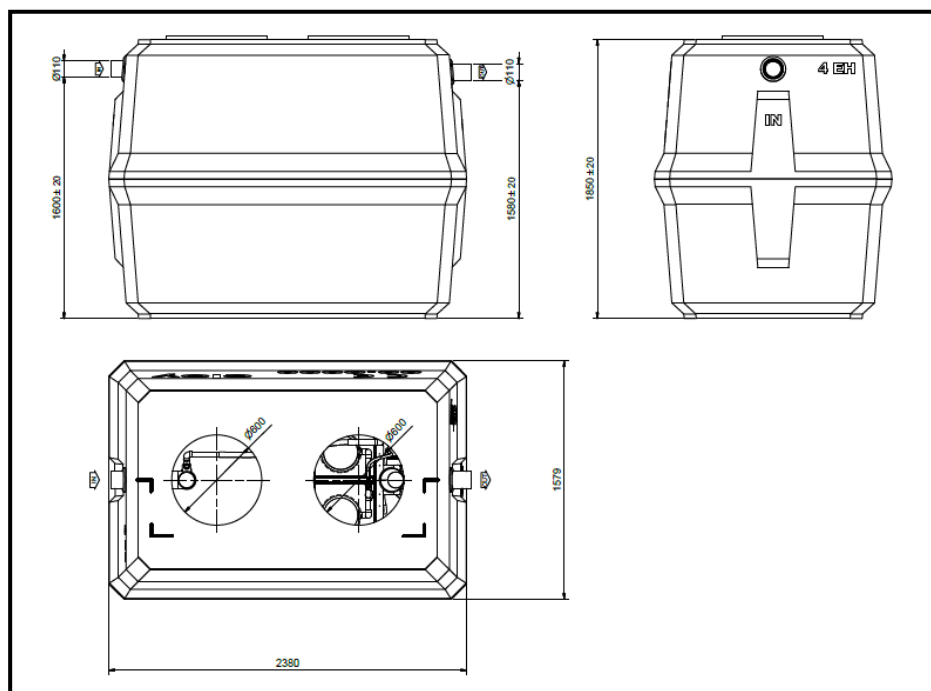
Dimensional drawing of the Oxyfix® C-90 MB 5 EP
